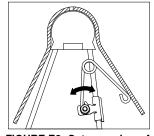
Cutaway view of driver side pivot arm and saddle.
